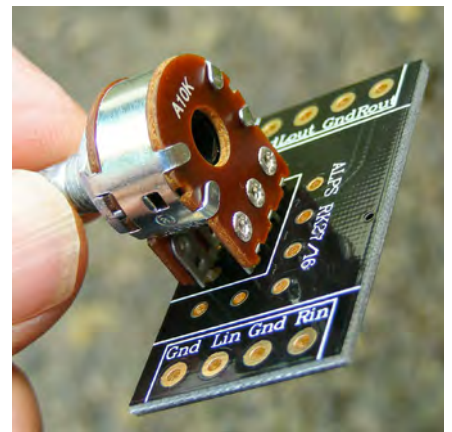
Special mounting boards for PCB-mount pots enables wires to be connected, avoiding in-use strain issues
